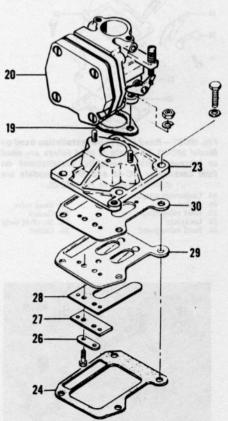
Carburetor mounting and inlet reed valve system on Models MC-2 and MC-20. Some other models are similar except reed guards are used.
